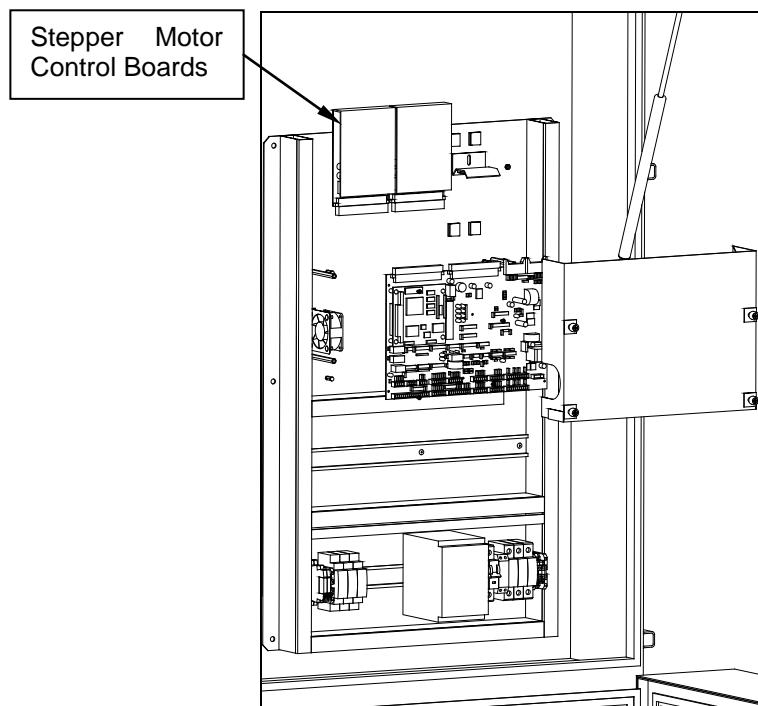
T2/3 STEPPER MOTOR CONTROL BOARDS
